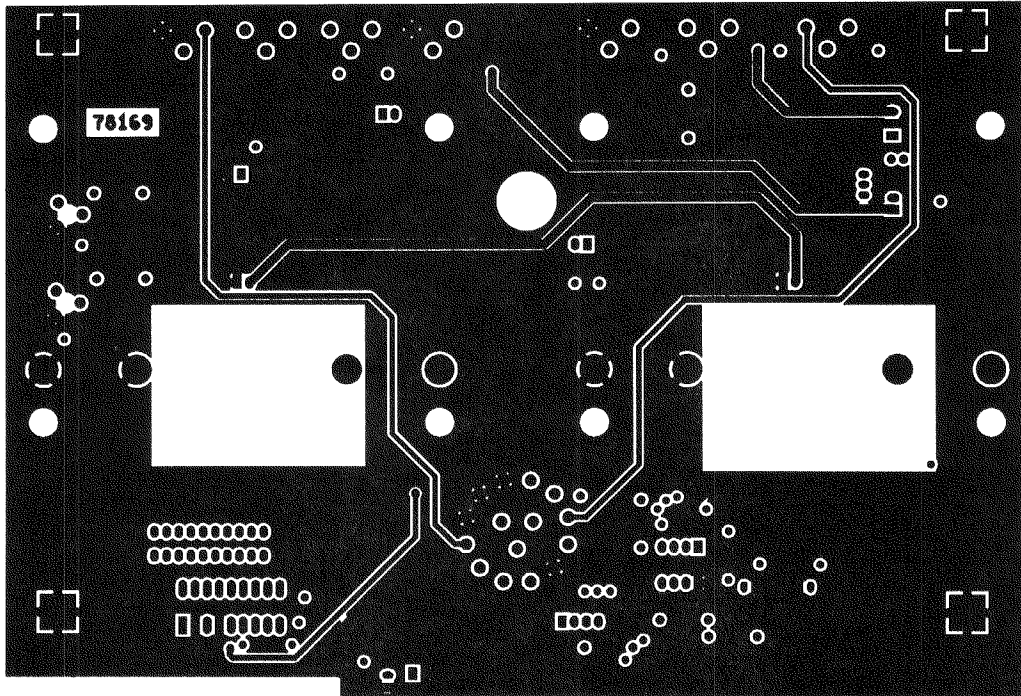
PLATE CONNECTOR BOARD COMPONENT LAYOUT TOP VIEW
